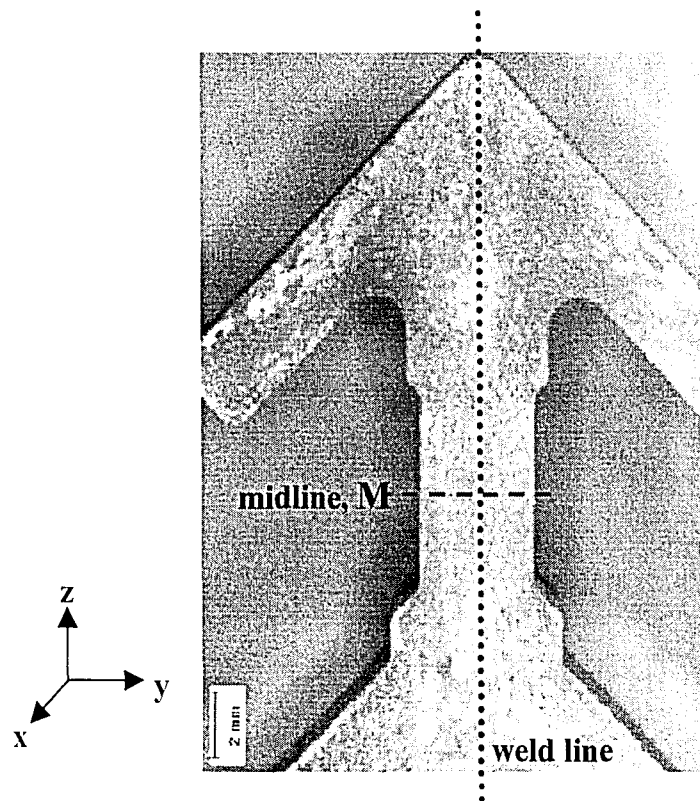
Section of industrial welded sample after macroetching.
